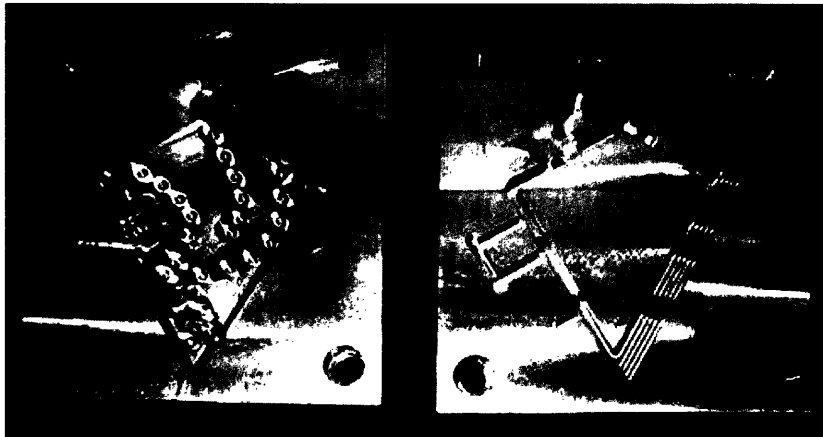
Cavity mold (left) including cavities corresponding to surface features and core mold (right) incorporating only locking tabs and having draft angle on only one side
